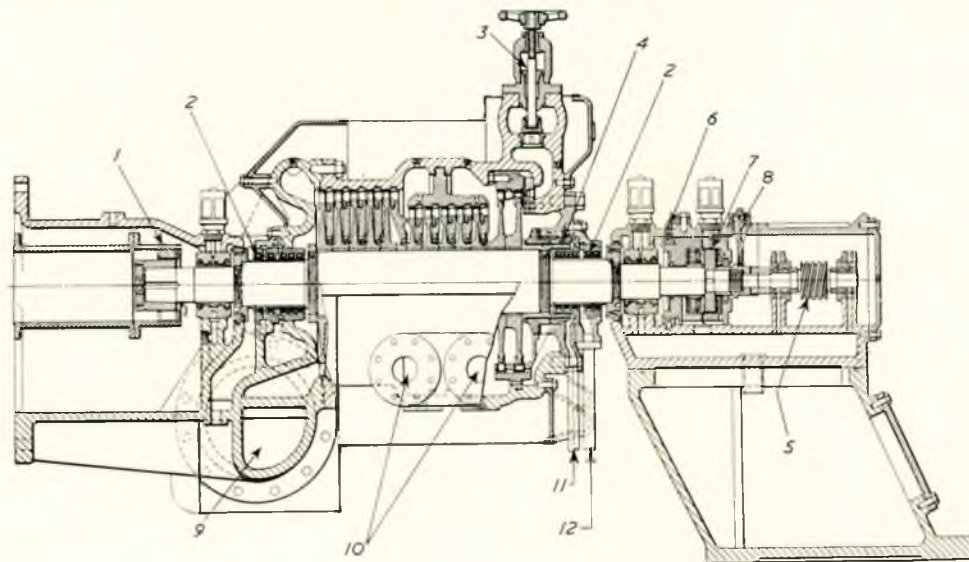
shows a section through the high pressure turbine. Interesting is the oil sump provided in the pedestal and the right angle drive provided for the governor oil pump submerged in the sump. The thrust bearing housing was adjustable. The turbine wheels were individual discs mounted on the shaft on taper bushings. The buckets were mounted on the wheel with cross pin fastenings for each bucket. The diaphragms were complete rings built up of individual vanes around a steel-ring centre with solidly mounted labyrinth packing at the turbine shaft. To disassemble this rotor it was necessary to remove a wheel, then a diaphragm, then the next wheel, next a diaphragm, etc. Dynamic balancing of the rotor involved building it up without the diaphragms, balancing, stripping down and then rebuilding with the diaphragms, although at that time the individual wheels were carefully balanced separately, so that a complete balance of the rotors was generally unnecessary even if a wheel had to be removed.
